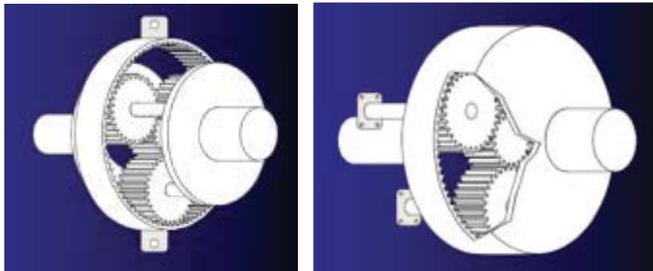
Planetary Gearbox Sketch. Figure 2b. Star Gearbox Sketch
